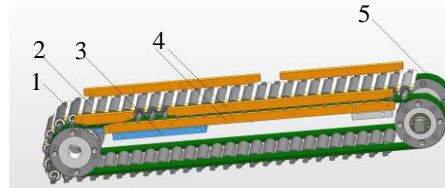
Design of motion model of Roller slewing mechanism; 1: cigarette; 2: roller; 3: friction plate; 4: guide bar for a limit; 5: circulating conveyor belt.
